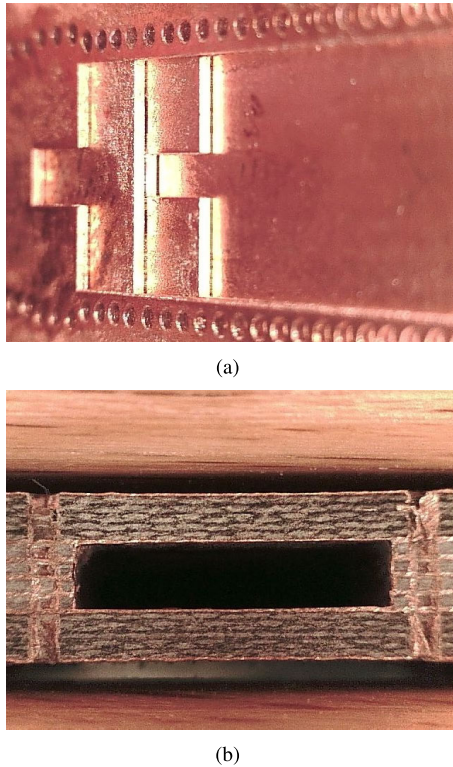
Manufactured device. (a) Detail of the transition, where rows of soldering vias have been mechanized to provide a better soldering finishing [11]. (b) Cross-section view.
